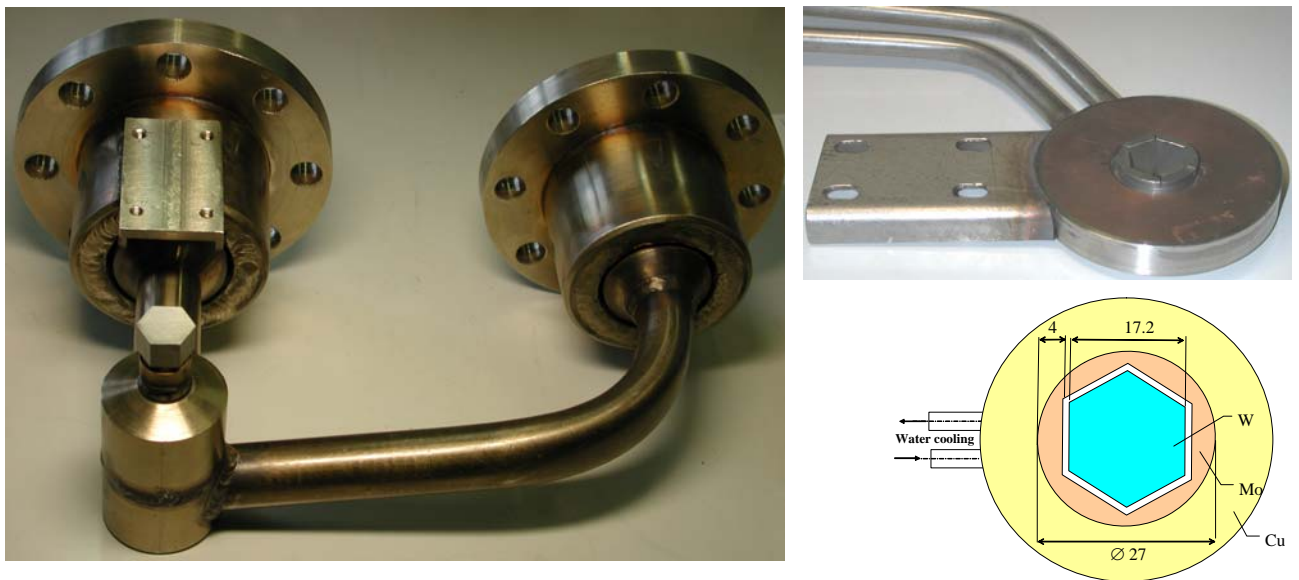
Target device with mock-up holder and water-cooled shielded mask.
